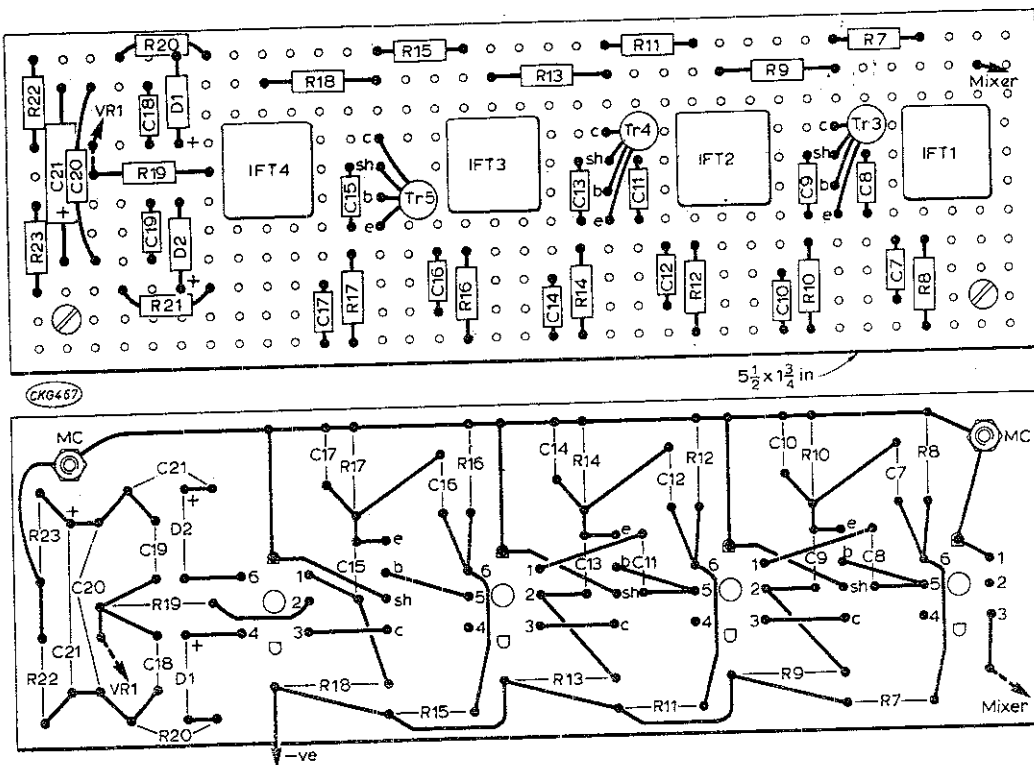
The two sides of the IF amplifier board, shown actual size, illustrating component layout and wiring
